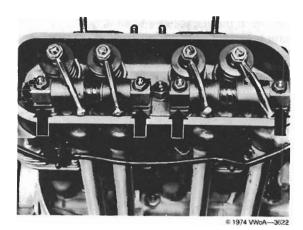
Single-carburetor rocker arm shaft installation. The slotted side of the support (left arrow) should point upward. The beveled end (right arrow) should be away from the cylinder head.
